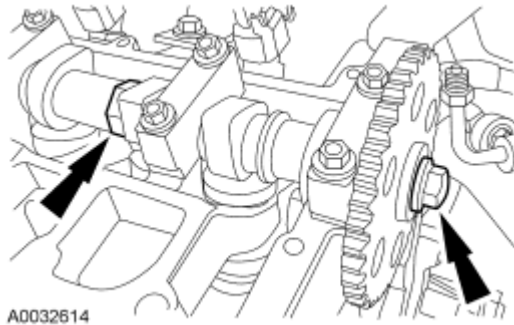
Identifying Special Camshaft Tool (303-465)
